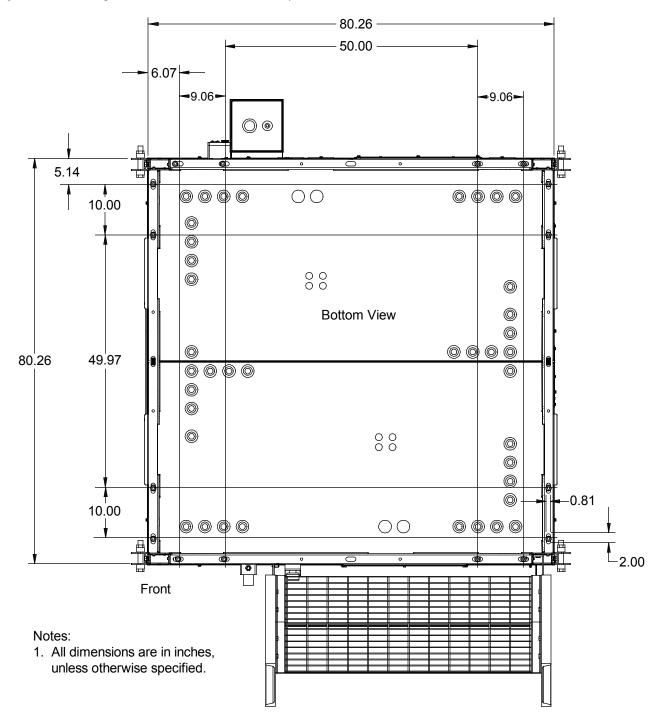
Mounting Hole Dimensions (without corner plates)
